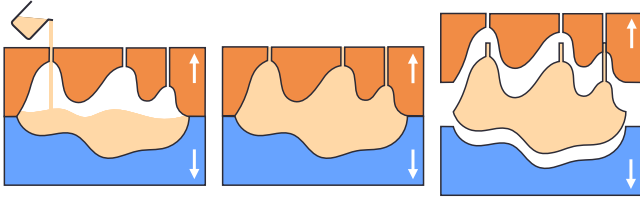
Molding procedure with a two-piece mold. First, the mold pieces are assembled to form a cavity, into which the liquid object material is casted (left). Pockets of air are avoided by outlets in the top mold piece. After material solidification (center), the mold pieces are removed, and the object (right) remains.
